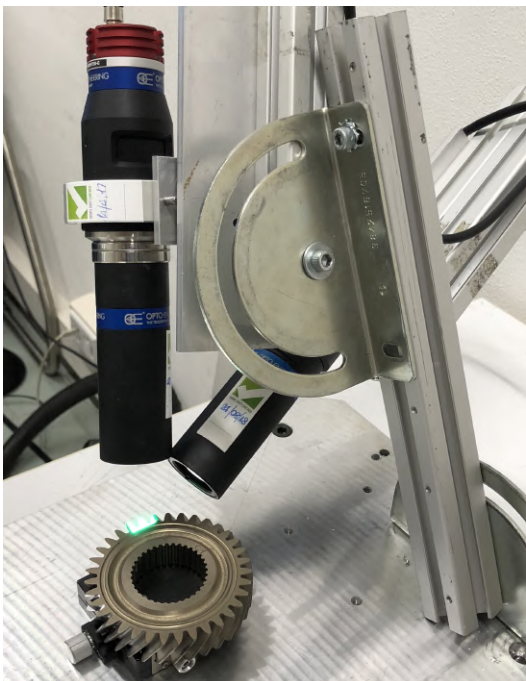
Our prototype setup to analyse the internal gear-wheel's surfaces
